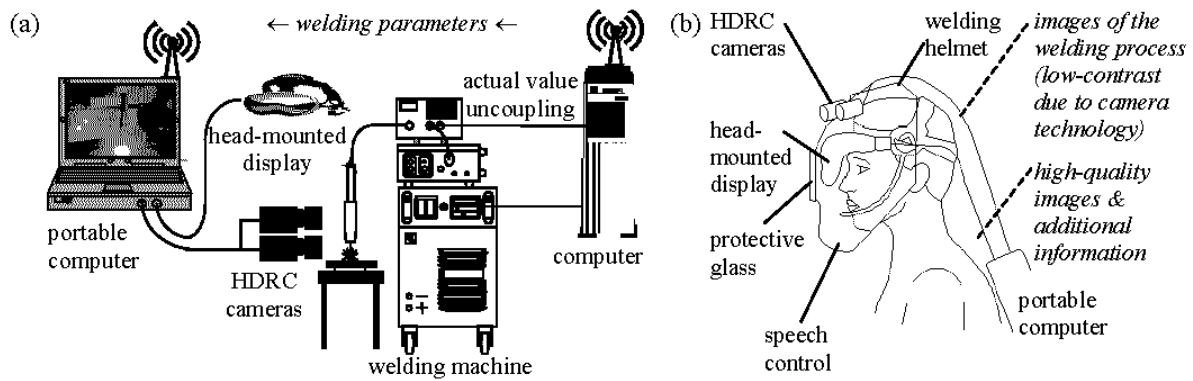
(a) Principle sketch of the system, depicted without welding helmet; (b) Welding helmet
